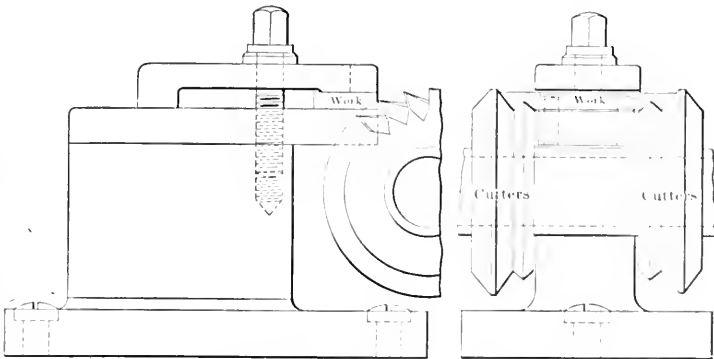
Alternative Fixture for Holding Work shown in Fig. 30
